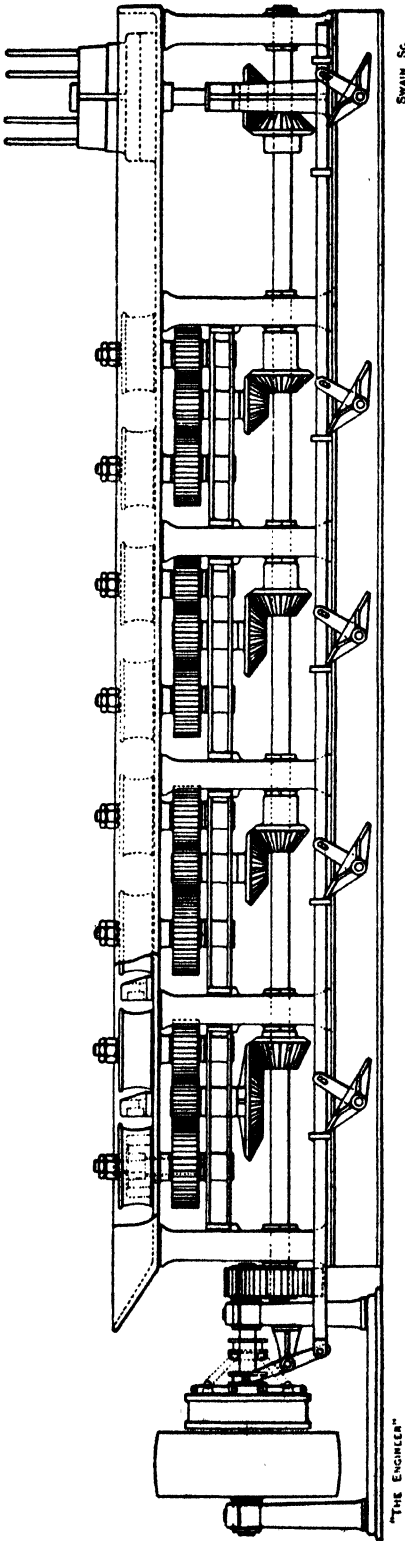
VERTICAL-ROLL CONTINUOUS WIRE-DRAWING MACHINE—DAVID BRIDGE.
